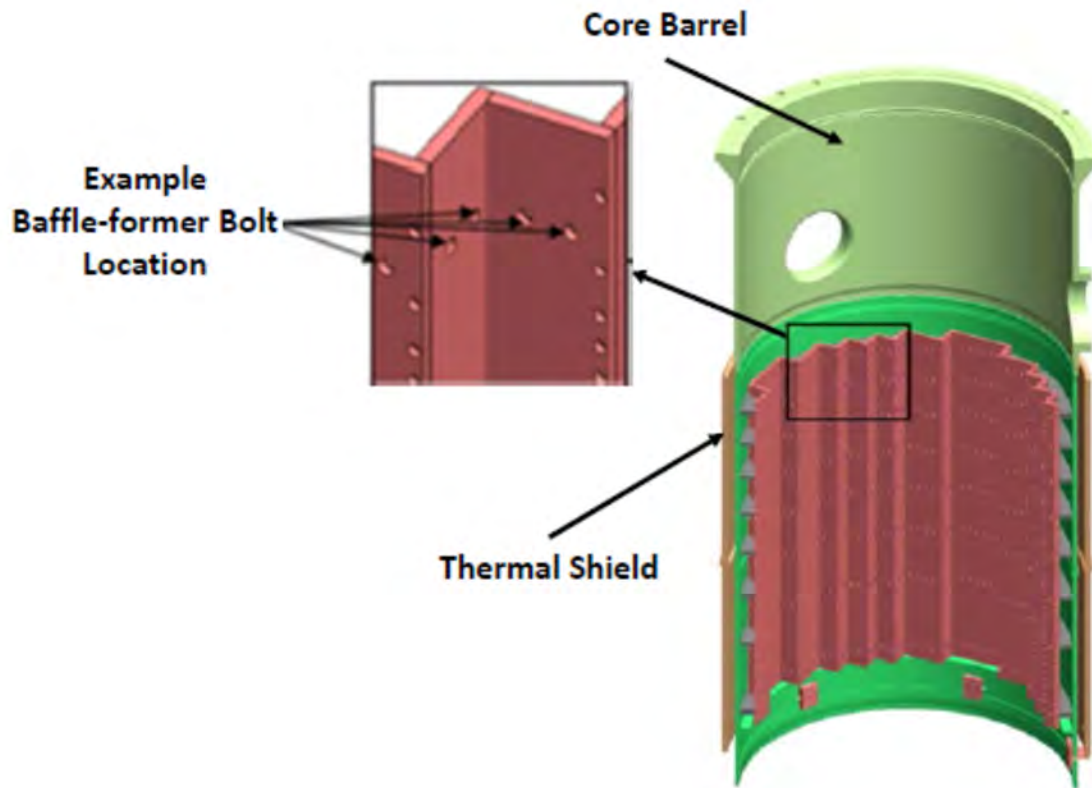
Three-dimensional view of a portion of the baffle-former assembly in Westinghouse-design RVI, showing baffle-former bolt locations (reproduced from updated Westinghouse Figures Presented at Public Meeting on MRP-227, Rev. 1, March 31, 2015, ADAMS Accession No. ML15091A136, Ex. NRC000211)
